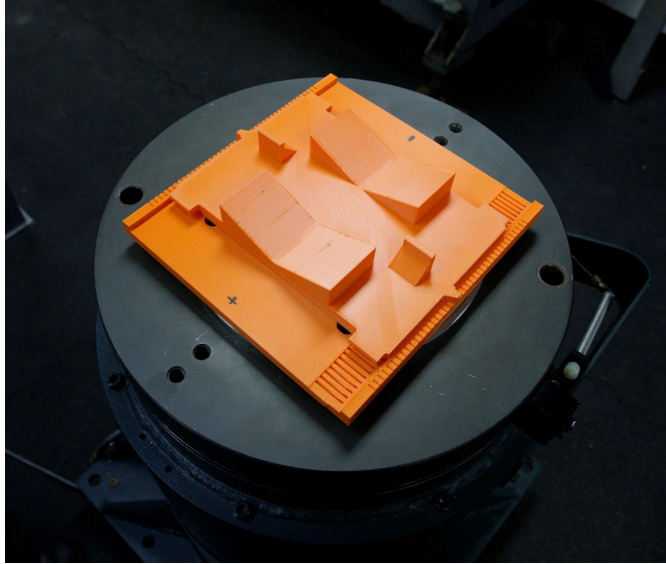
MOI-C with sliding fixture for large-caliber projectiles.
